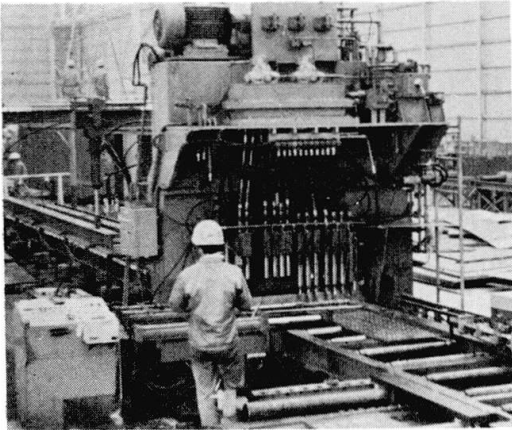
; N/C Drilling Machine for Splice Plate (S-COM)
